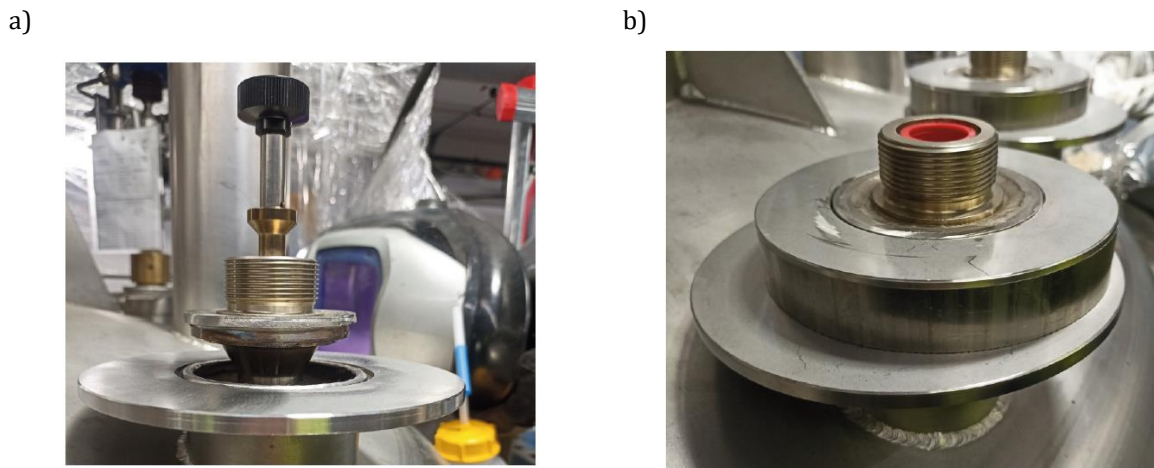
a) one of the methods for checking the correctness of the valve installation, b) the relaxed valve with the adapter.
